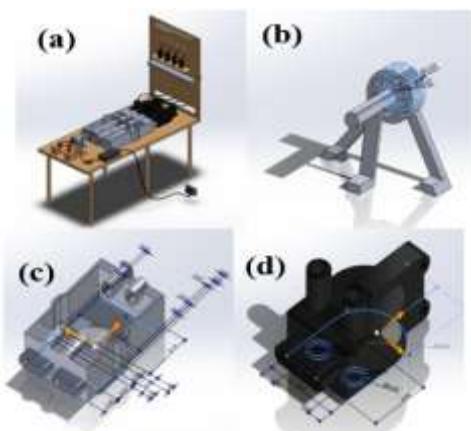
3D draft of various parts (a) Designed Ignition system, (b) Fan motor, (c) Shock sensor & gear turning component, and (d) Ignition coil
